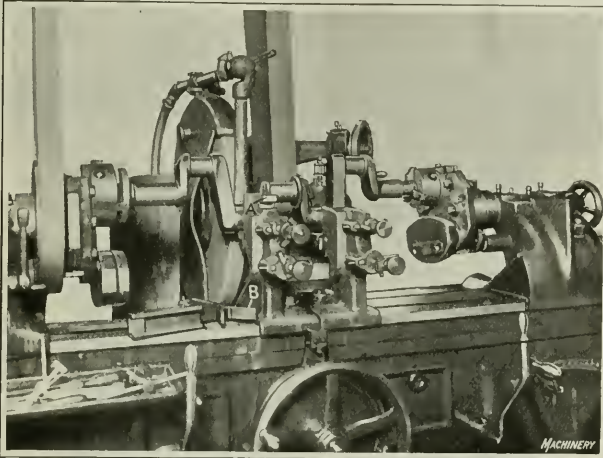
Crankshaft Regrinding Machine set up for refinishing Crankpin Bearings on a Four-throw Crankshaft
